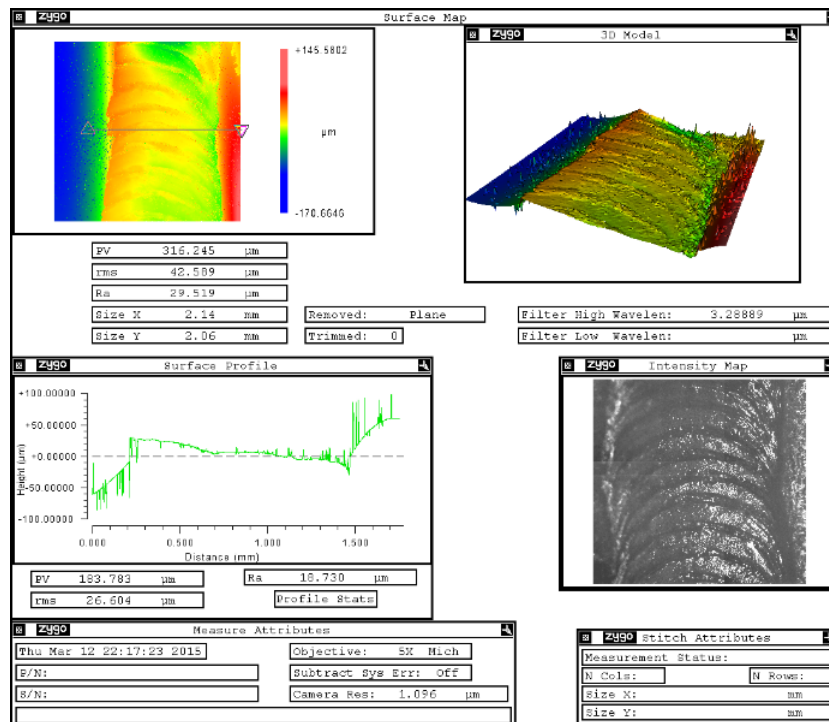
Two – dimensional surface and 3D maps of laser peened welded Nimonic 263 sheet
